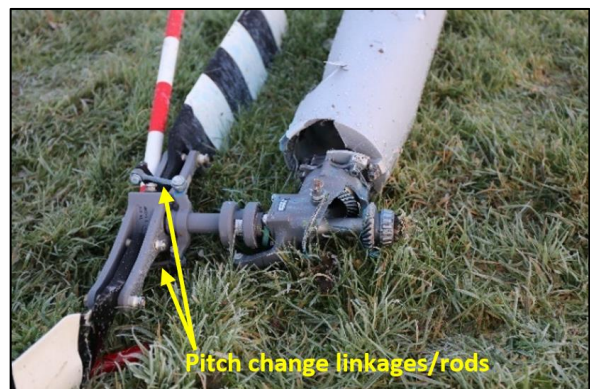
Tail rotor head /gearbox (Photos taken on the morning after the accident)
